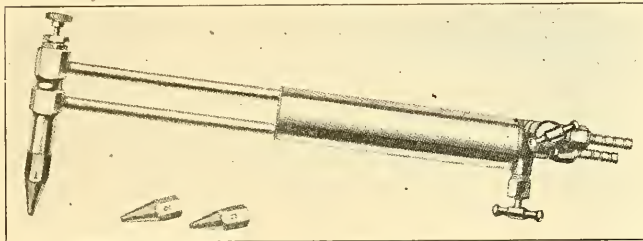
The Oxweld Sheet-Metal Welding Torch
